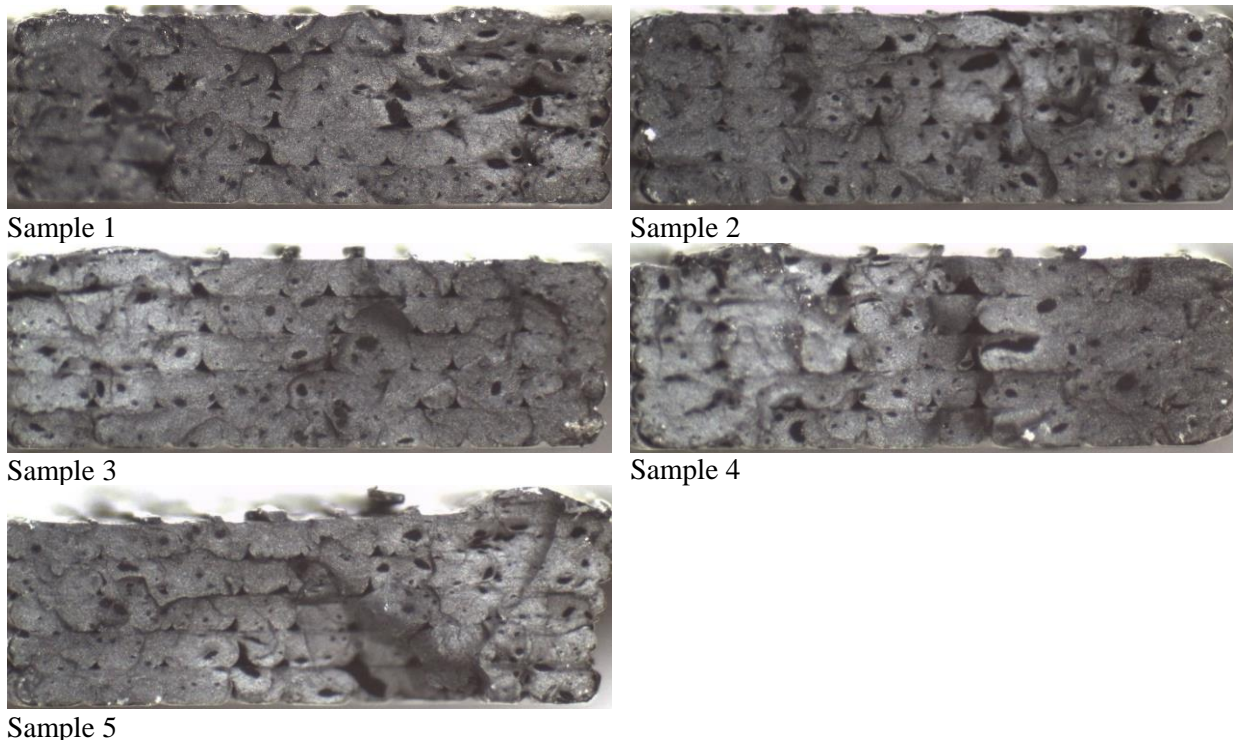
Fracture surface of printed tensile test samples, ABS/2 wt% CNT
